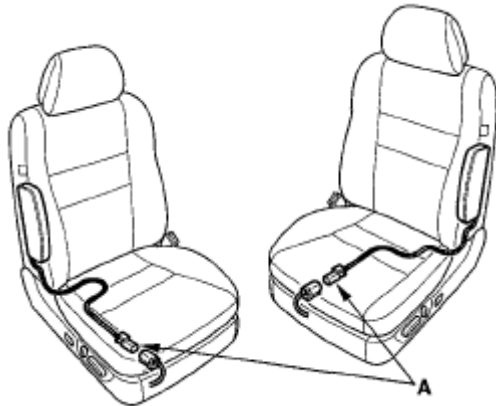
Identifying Seat Side Airbag Harness 2P Connectors
